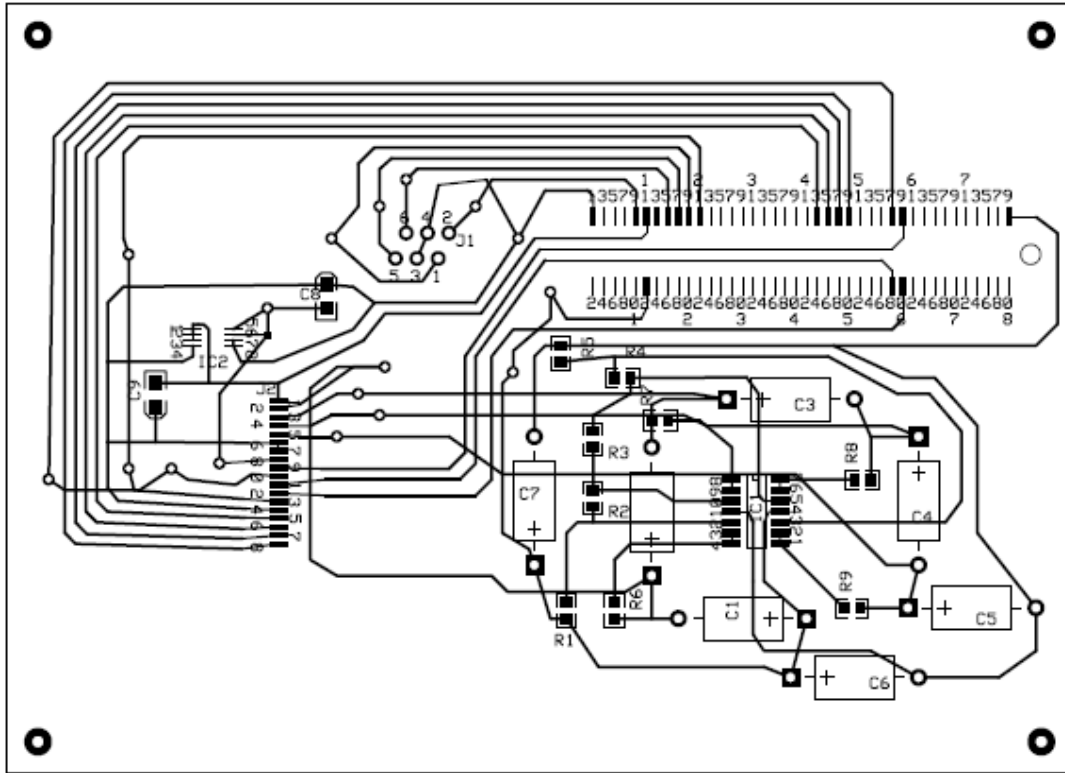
LCD PCB version two with top and bottom traces as well as solder mask.
